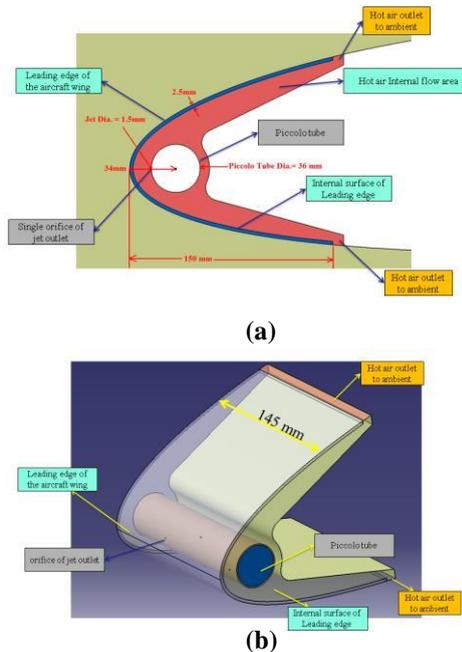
2D and 3D models of wing and piccolo tube assembly
